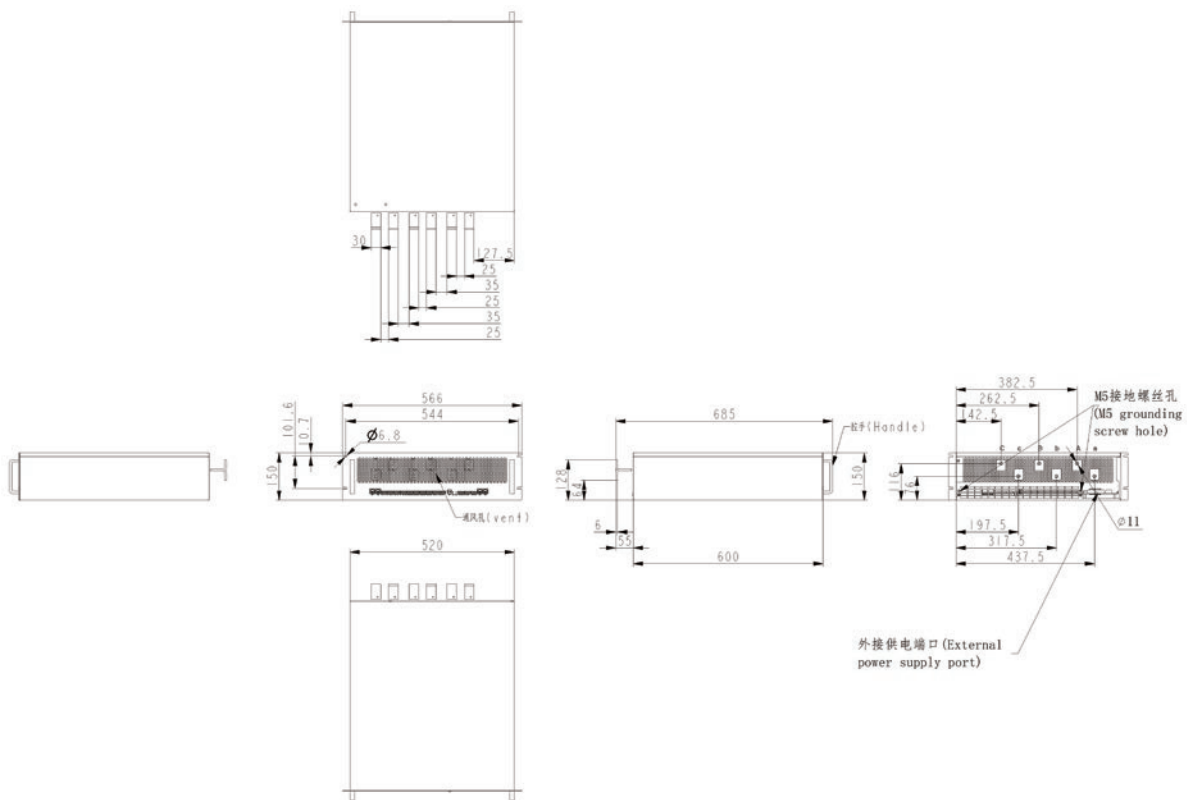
HT-300STS Product Mounting Dimensions (Unit: mm)
